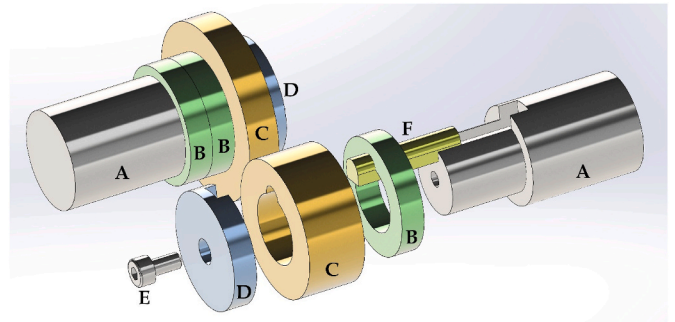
Discs assembly. A: Shafts, B: positioning discs, C: test discs, D: washer discs, E: bolts, and F: shaft key.
